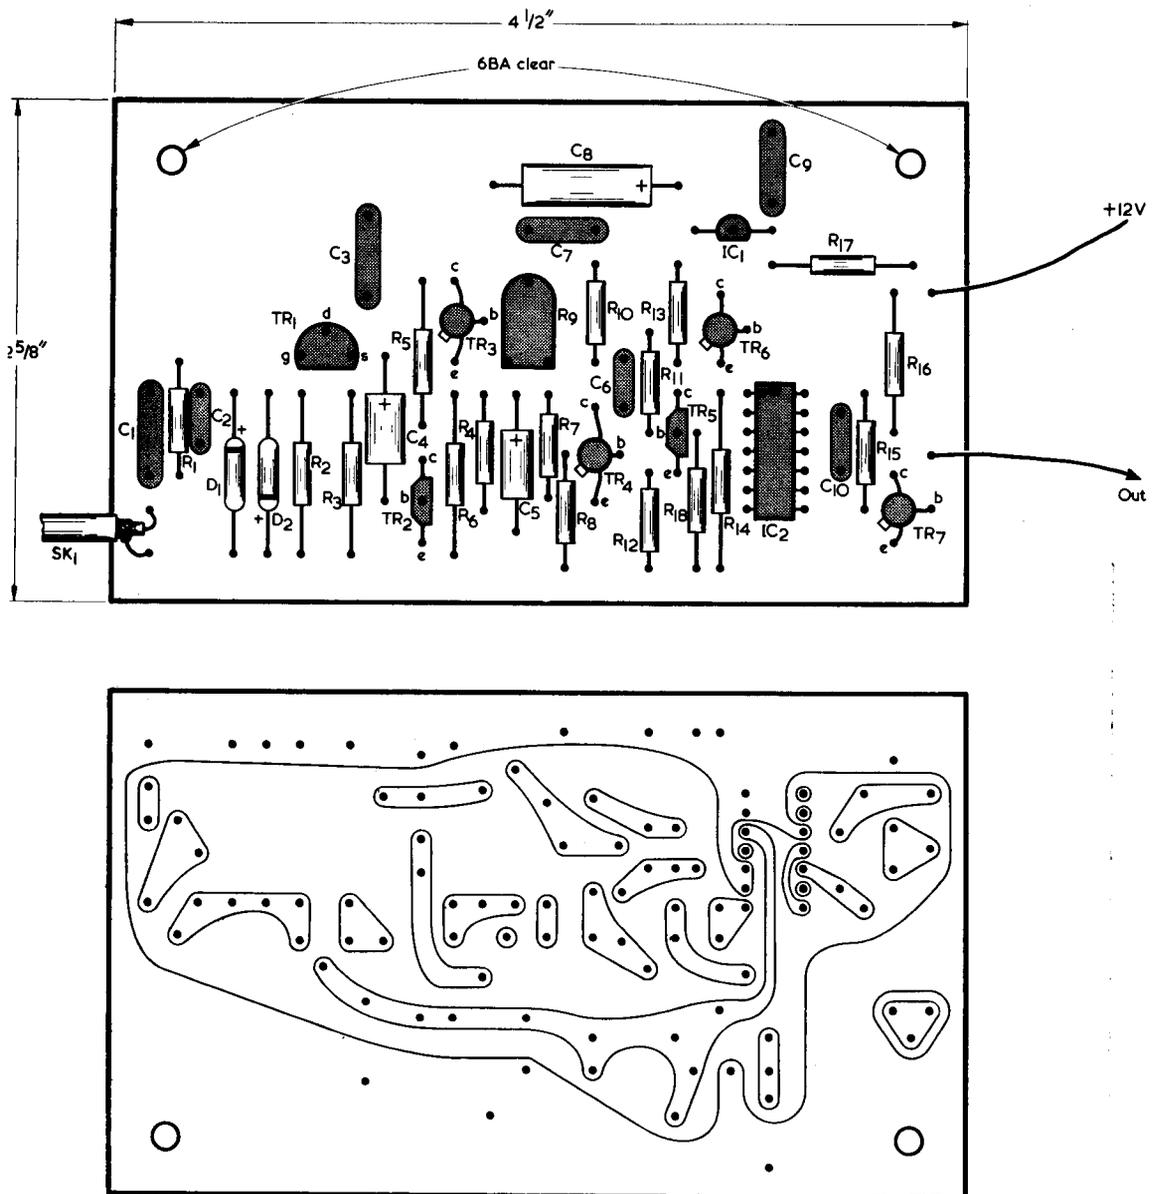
Component and copper sides of the printed board on which are assembled the input, Schmitt trigger and prescaler stages. The board is reproduced full size
